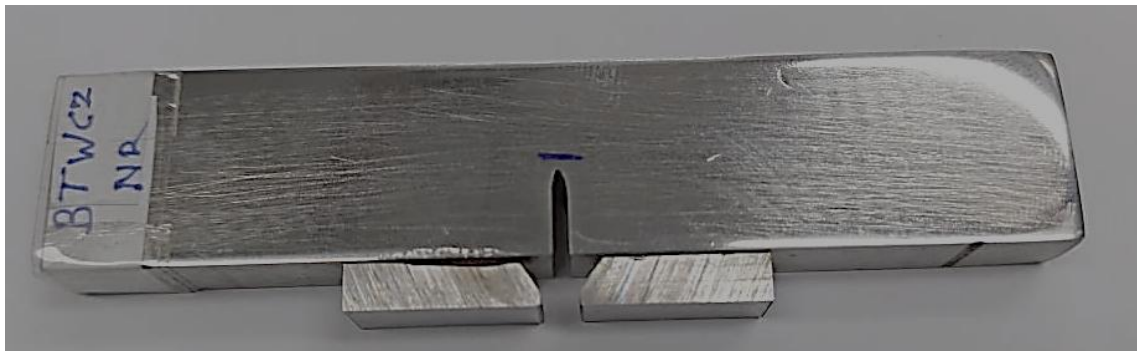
A standard specimen for the 3-point bend test with knife edge attachment
